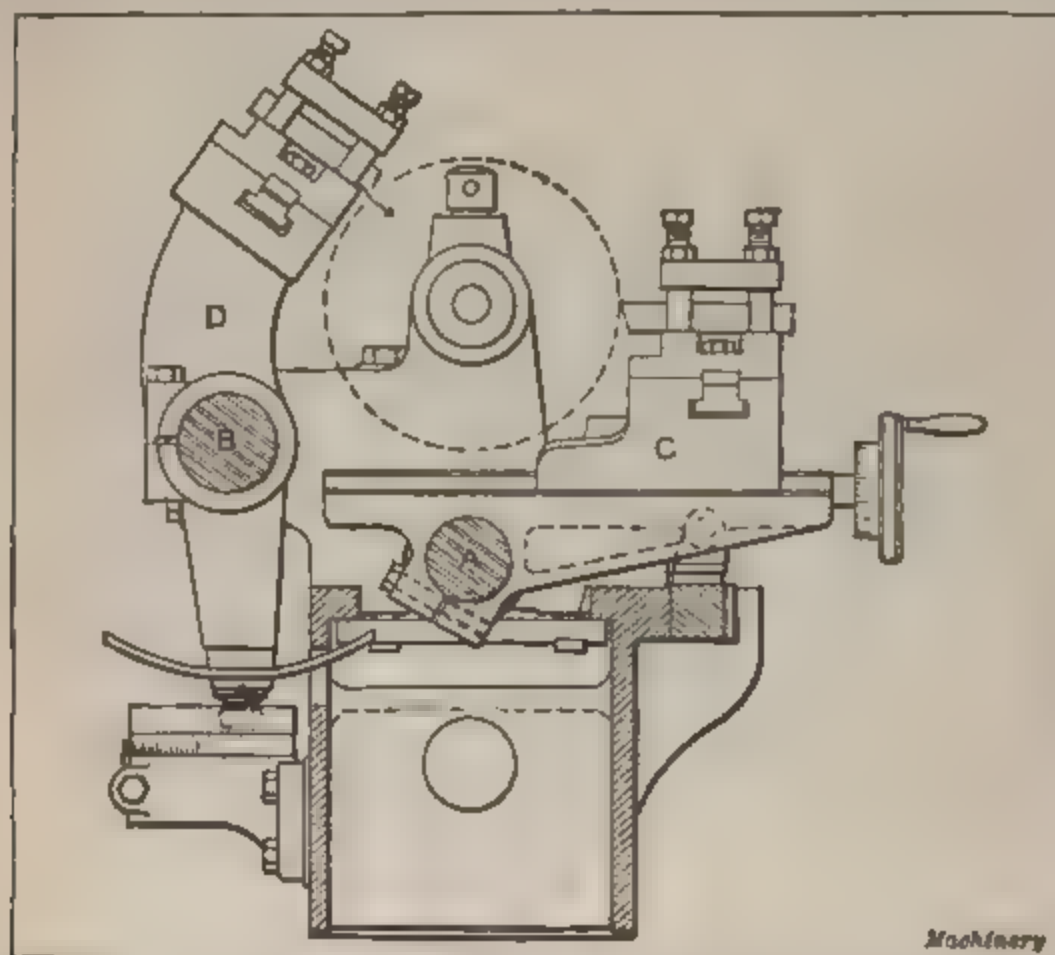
Cross-sectional View of Fay Automatic Lathe
